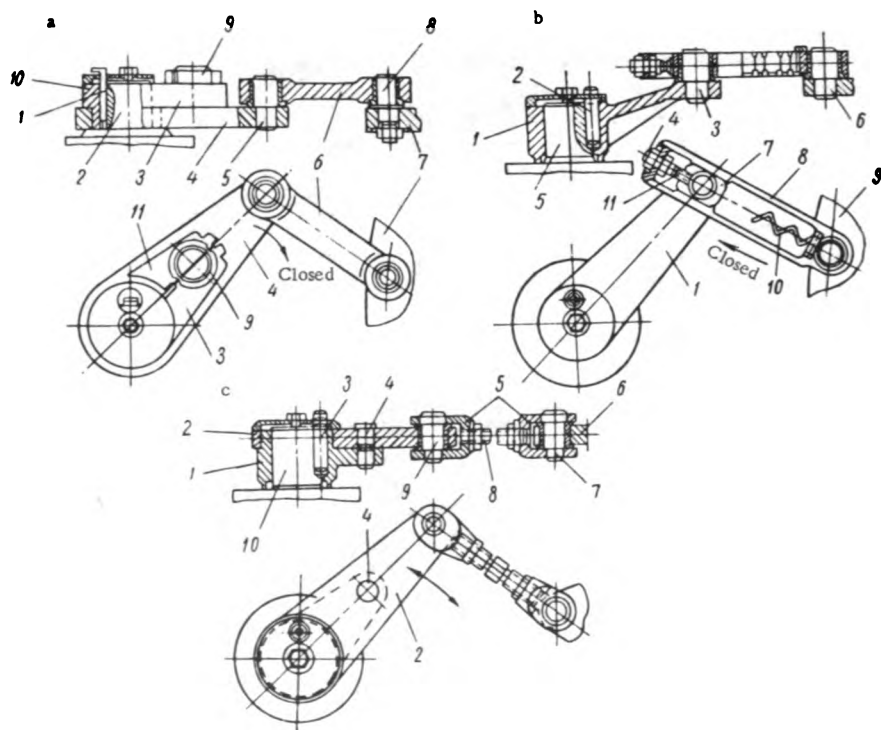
Designs of guide-vane actuating mechanisms
